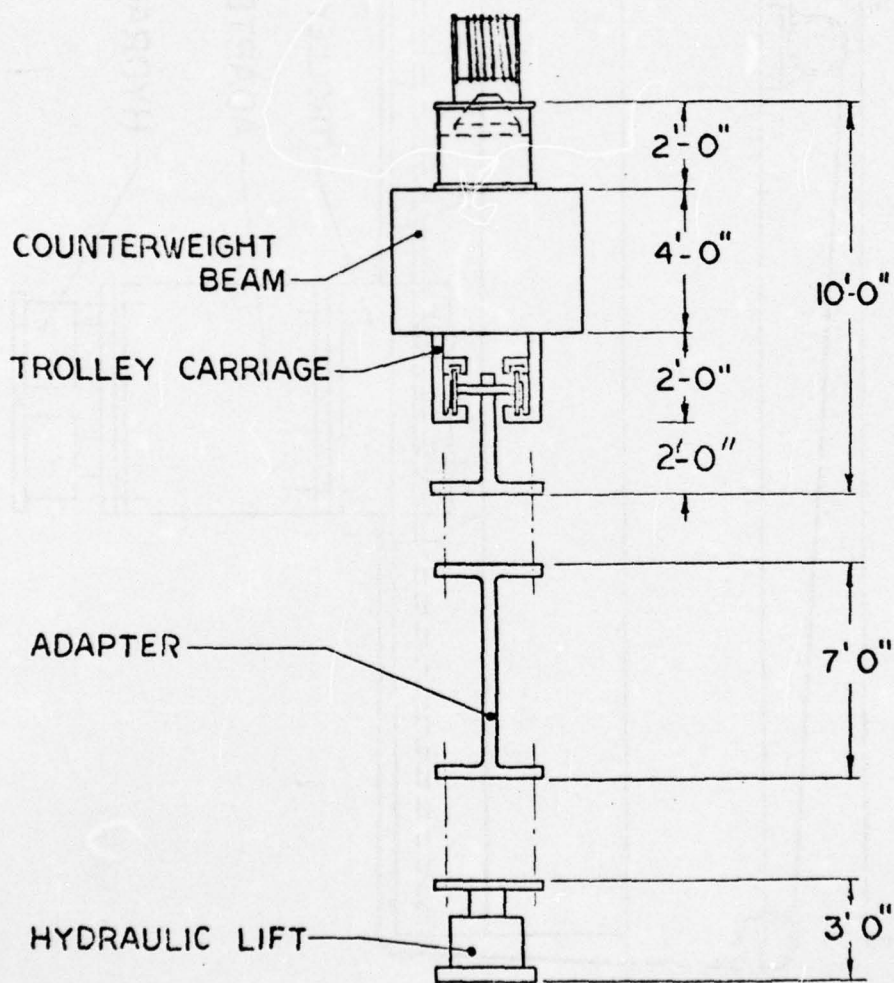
Counterweight Beam With Winch and Trolley - Section
